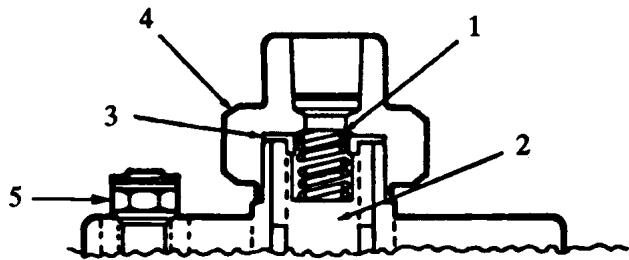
Air Dryer CR Brakemaster Model 62 - Disconnect Air Line
